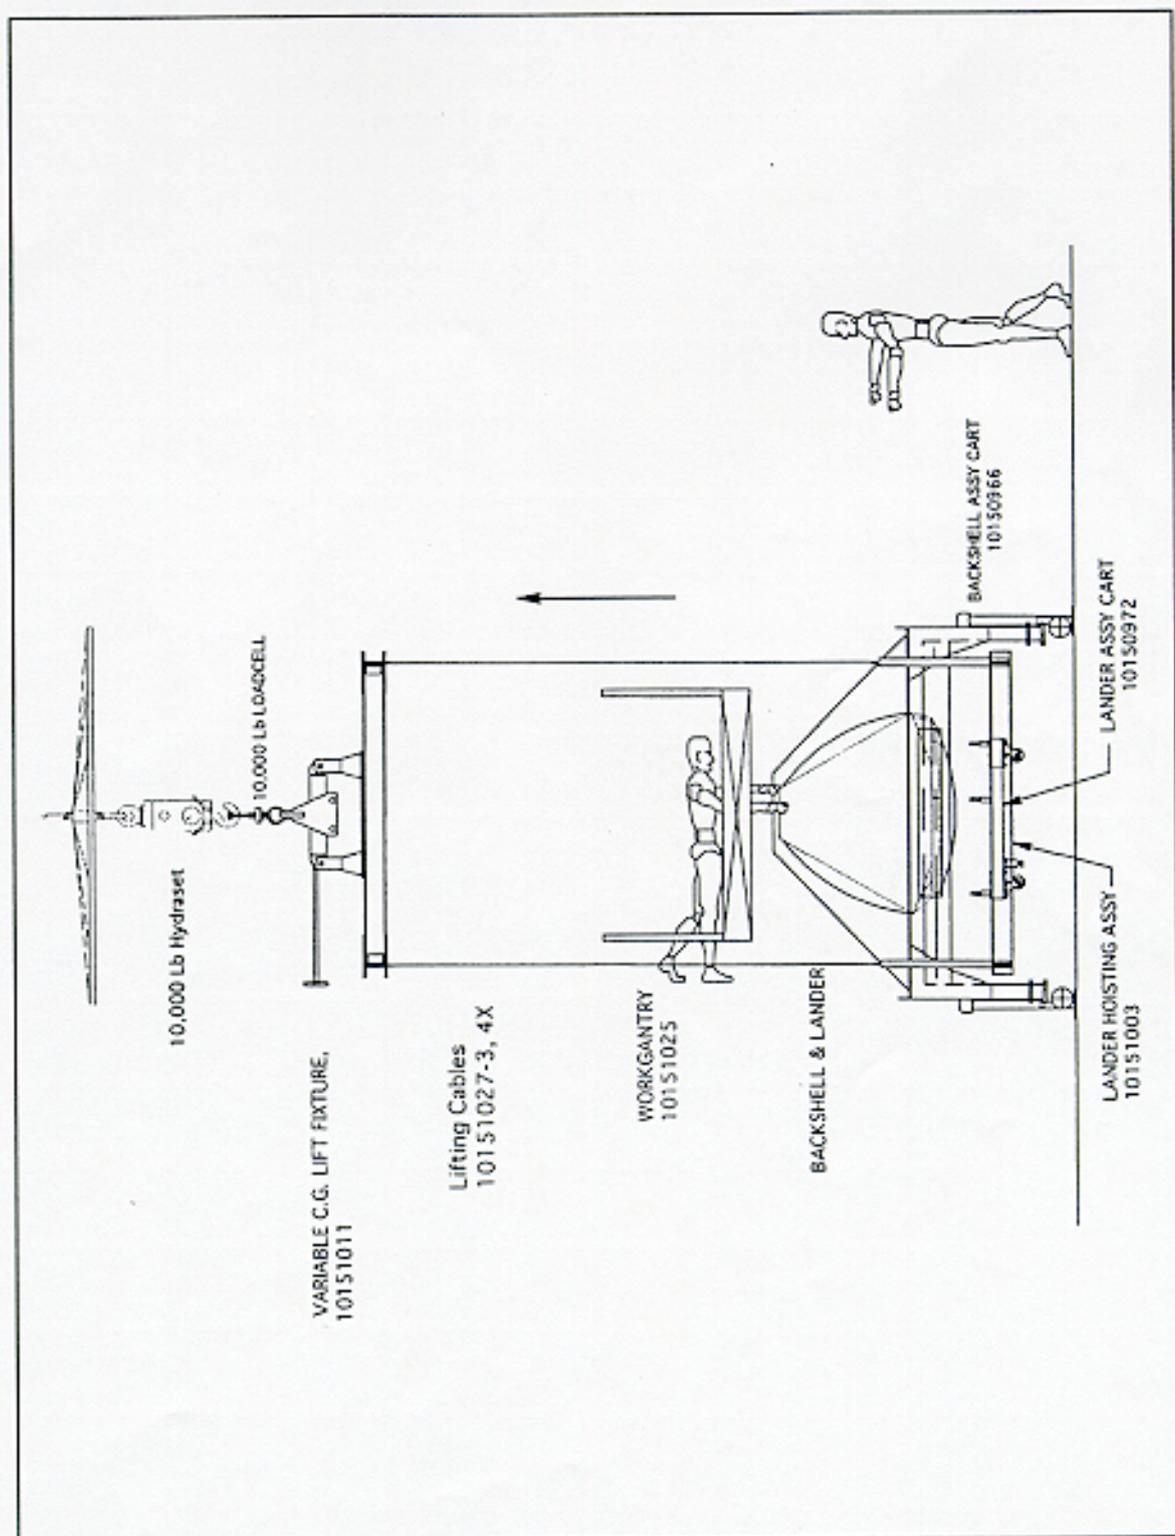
Attaching Detaching the EDL On & Off the KSC Spin Balance Machine
